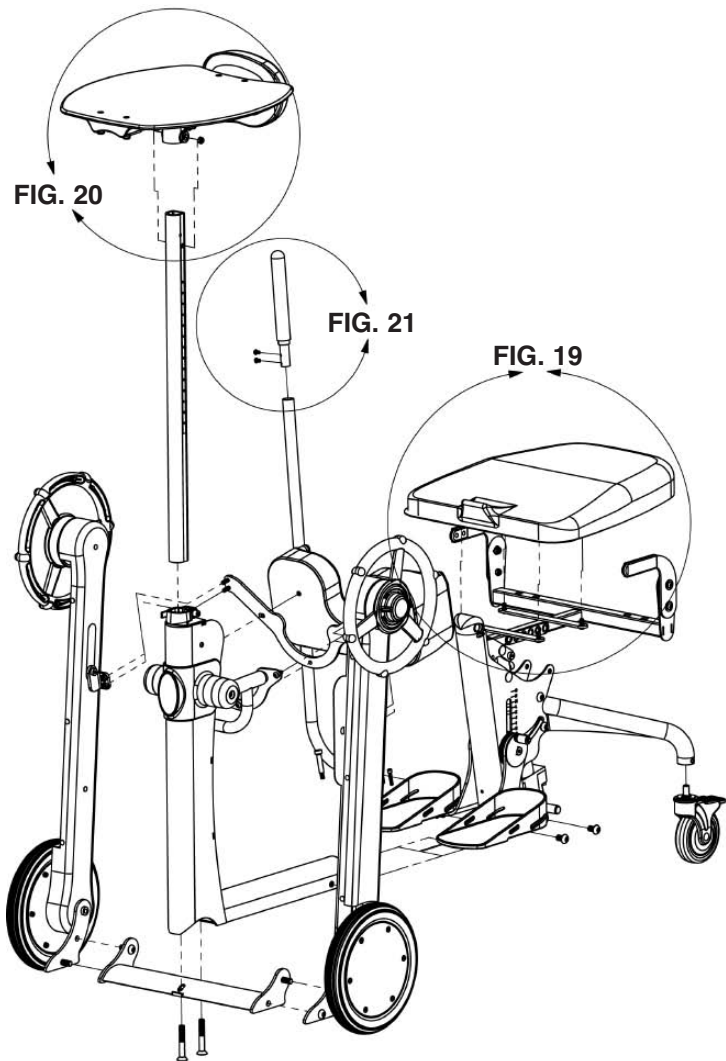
Attach the casters to the rear seat assembly and tighten using the wrench provided, do not overtighten.
